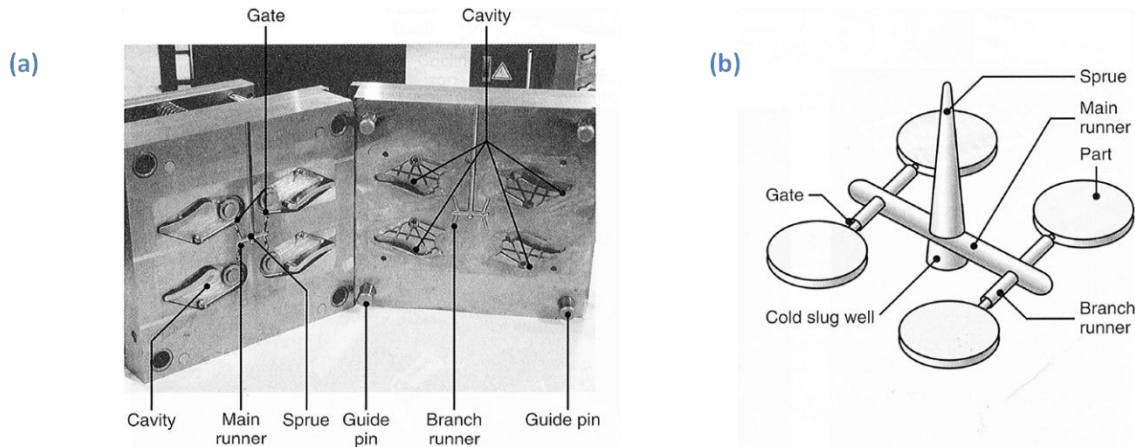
(a) Cold-runner two-plate mold and (b) part ejected from injection molding.
